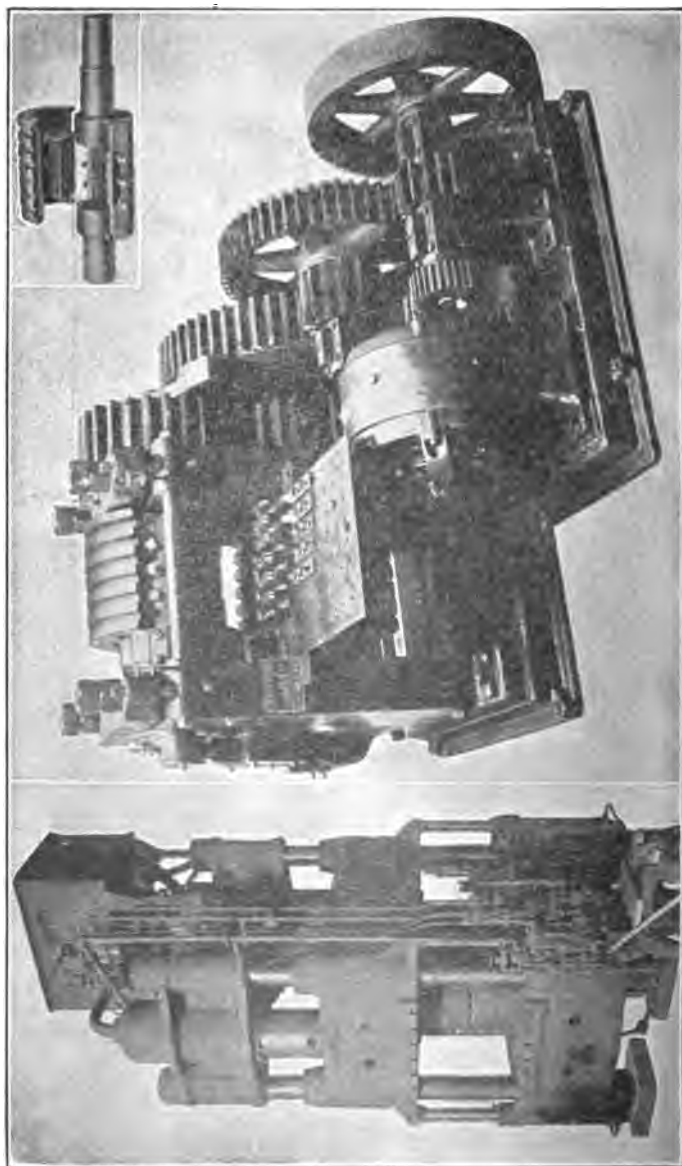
BOLT HEADING, UPSETTING AND FORGING MACHINE
